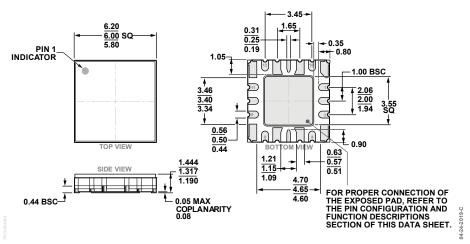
16-Terminal Ceramic Leadless Chip with Heat Sink [LCC_HS] (EH-16-1)
